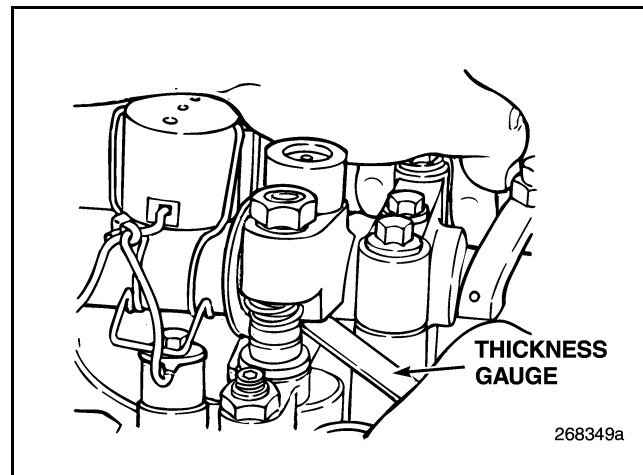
Inserting Thickness Gauge Between Brake Plunger and Actuator Pin
